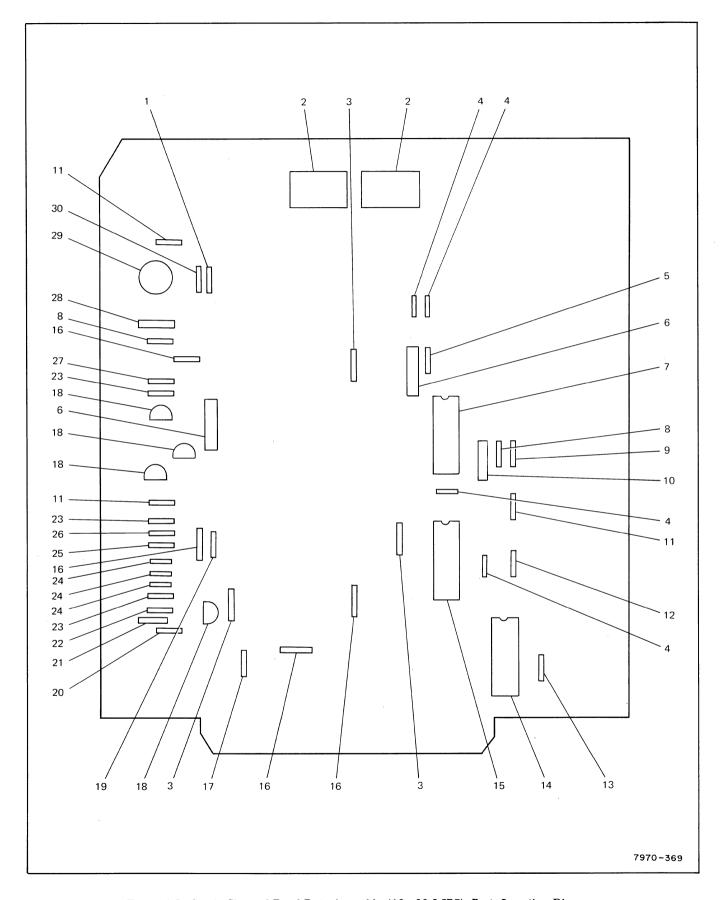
Single-Channel Read Data Assembly (10 - 20.9 IPS), Parts Location Diagram
